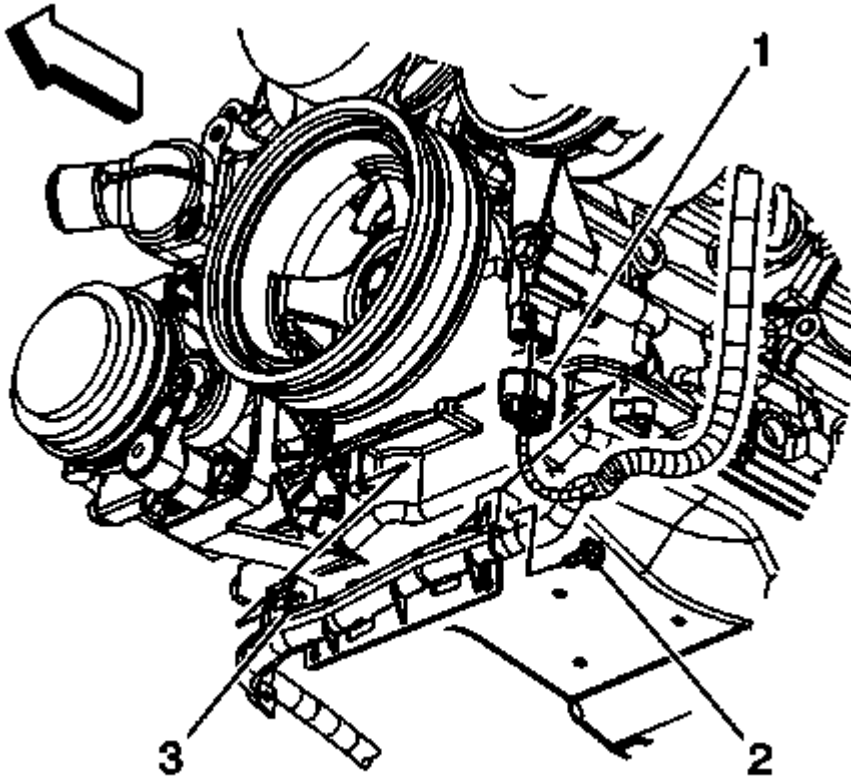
View Of Electrical Connector, Cable Channel Bolt & Pin
